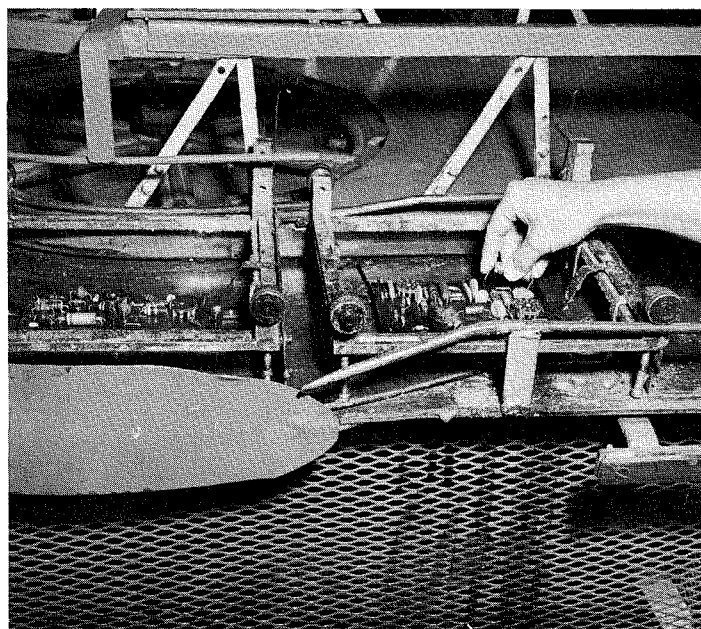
View of a portion of the merry-go-round conveyor equipment where remainder of components are hand assembled on the printed boards.
